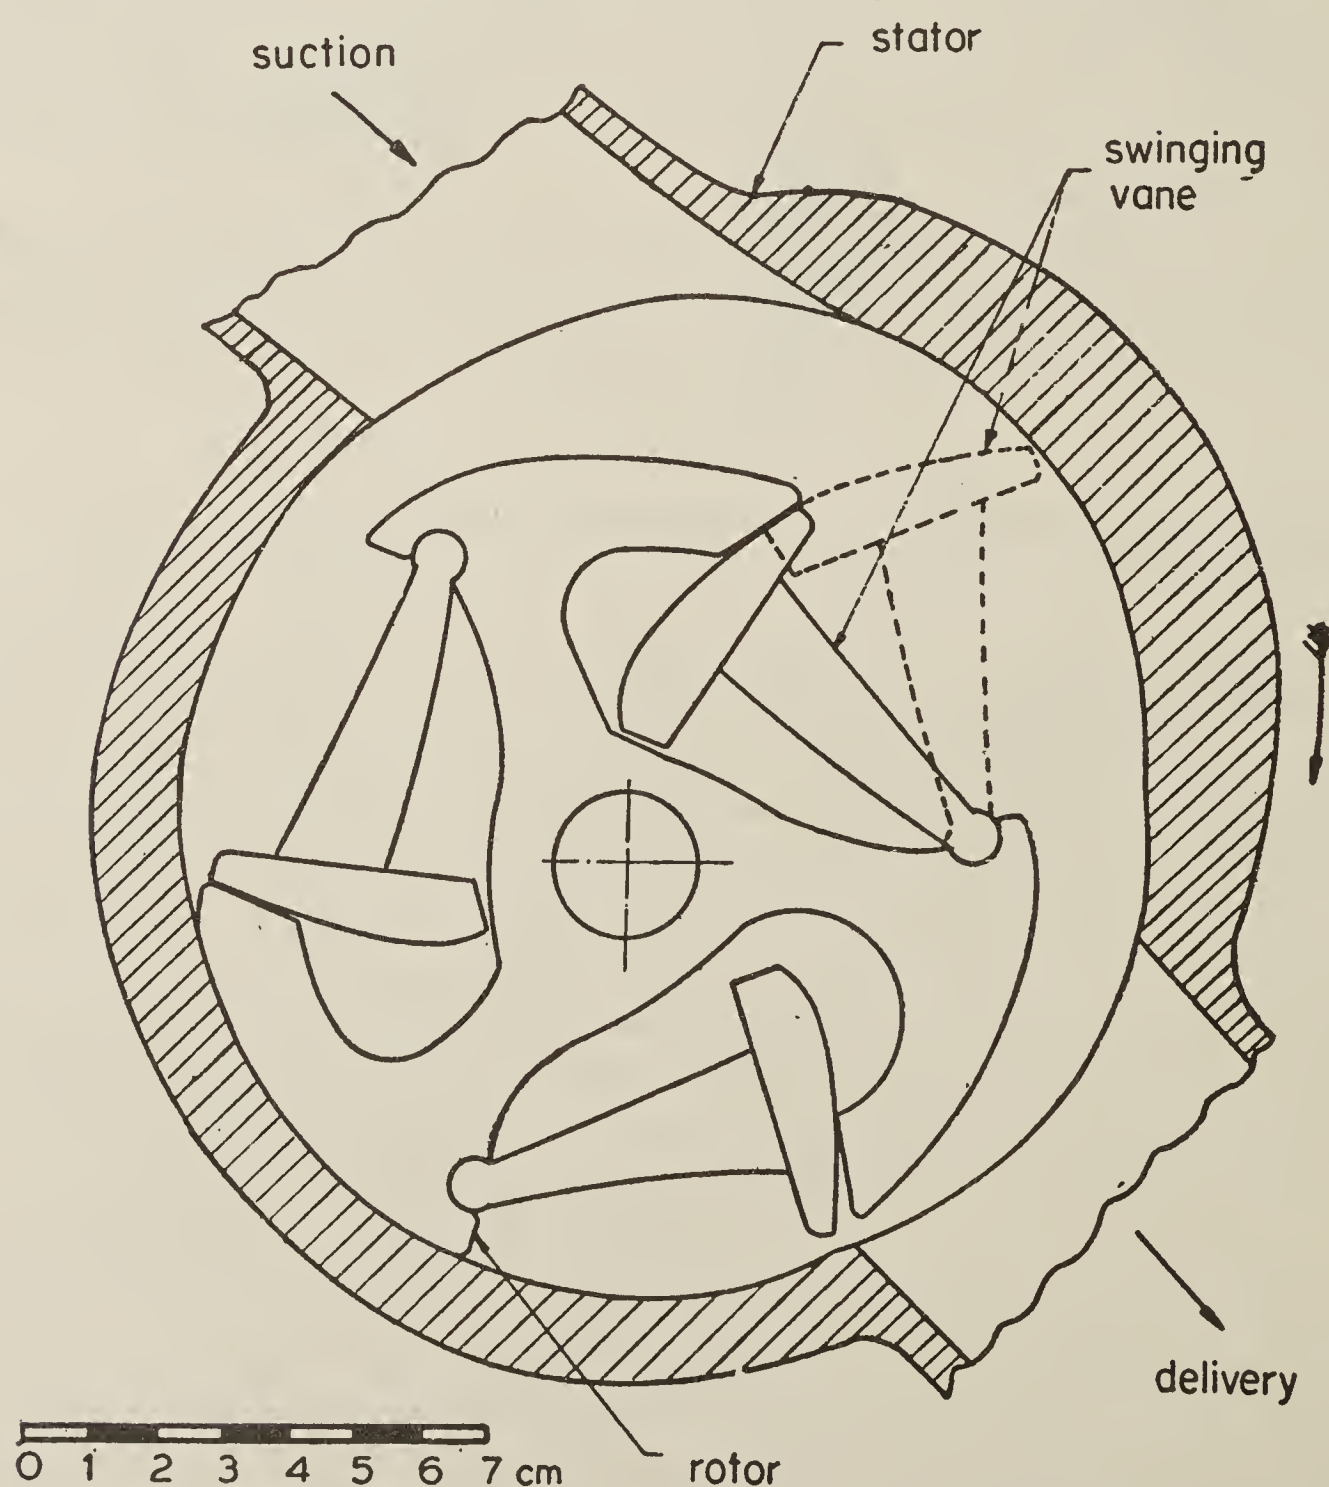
Swinging vane rotary pump (schematic) consisting of three gun metal vanes pivoted on an eccentrically mounted rotor.
